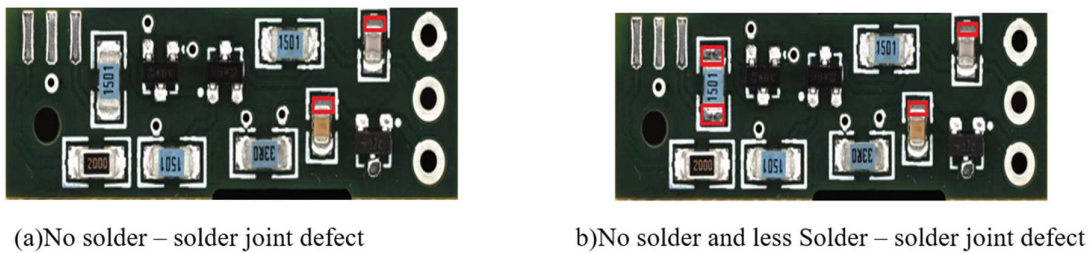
Component and solder joint defects localization in defective SMT assembled PCBs
